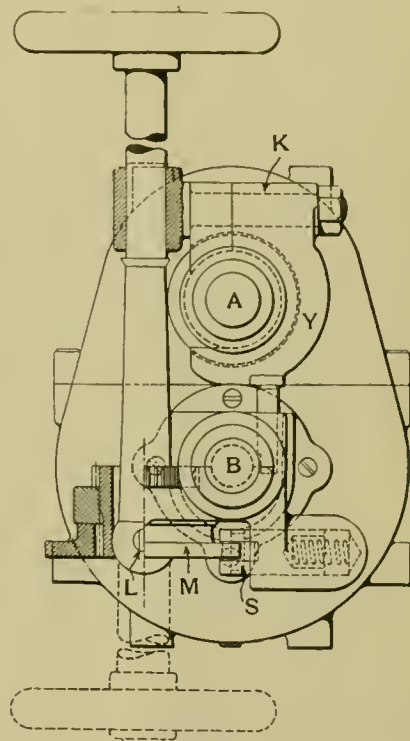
END ELEVATION SHOWING OPERATING HANDLE MECHANISM, AND PLUG ATTACHMENT, S.
